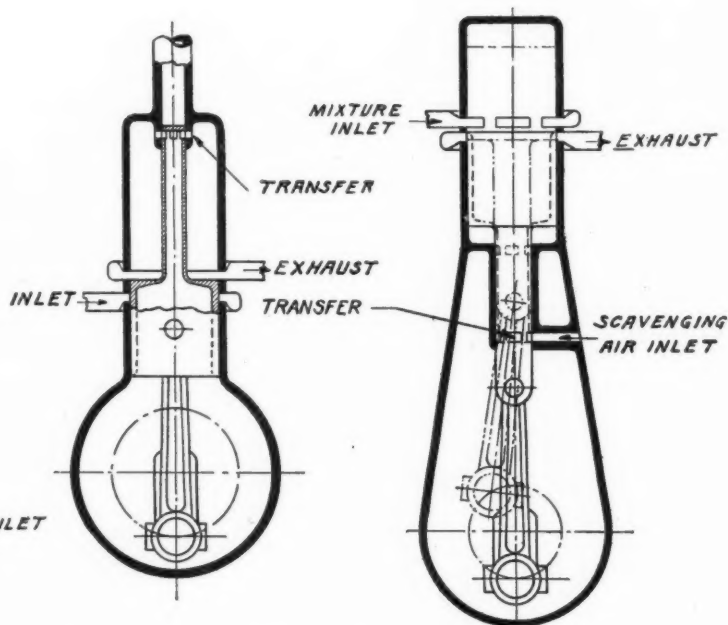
Knox type motor with double intake and exhaust ports and special deflecting top piston
